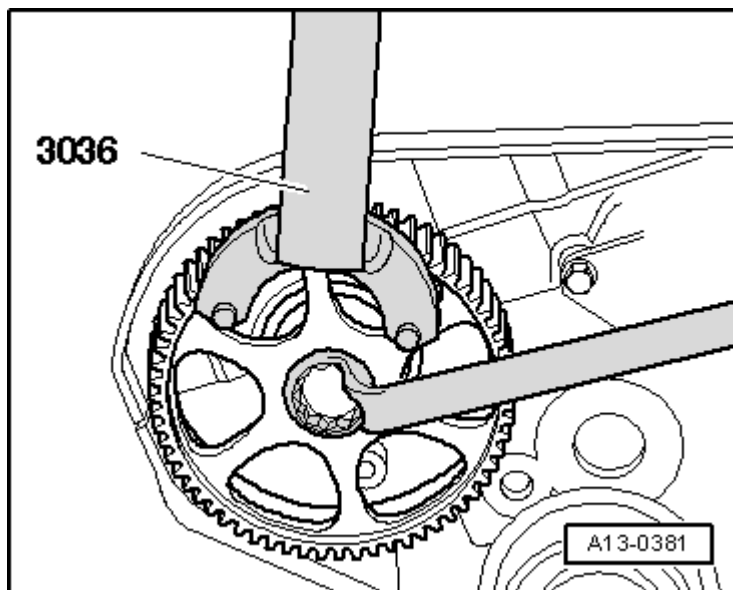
Identifying Use Of Counterhold On Camshaft Gear Using 3036 Retainer
